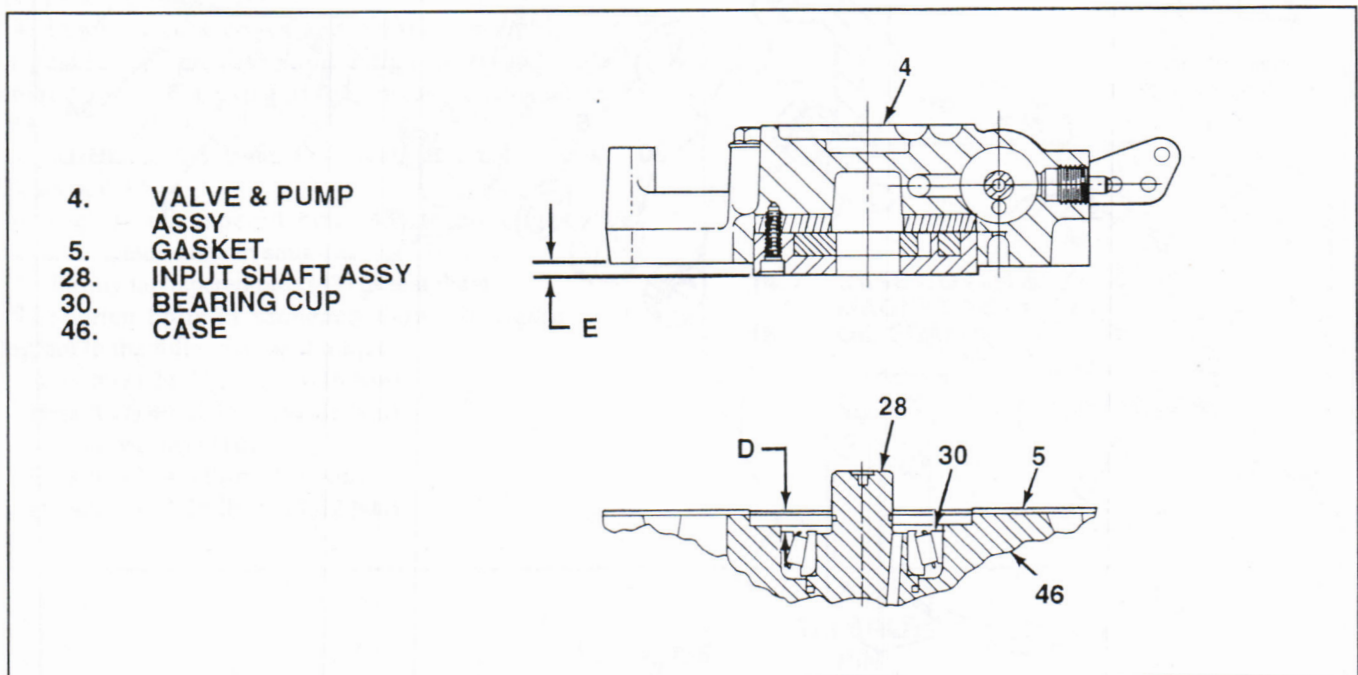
Determining Input Shaft Bearing Shim Thickness
